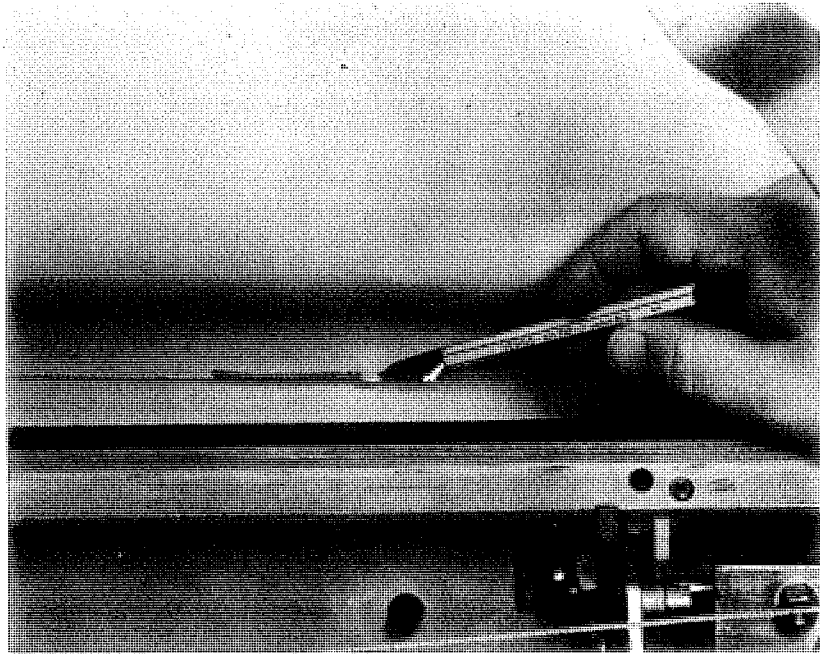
Shows cable fitted with a spring cushion and clamp assembly.
